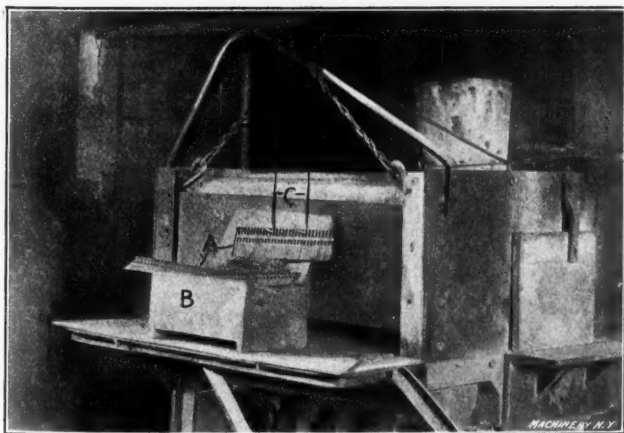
View showing Method of Bunching Jaws for Carbonizing
